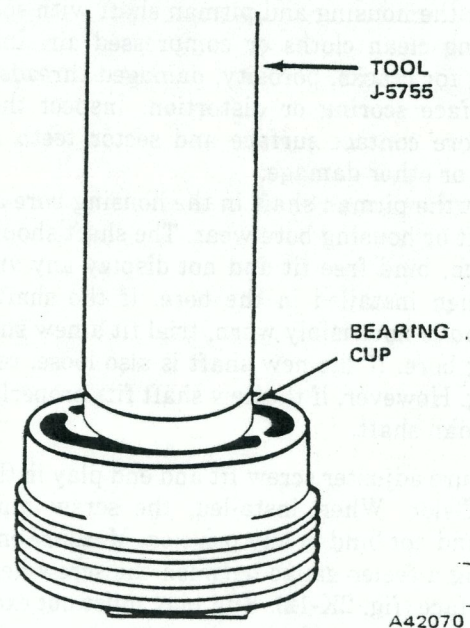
K-10 Installing Wormshaft Lower Bearing Cup
